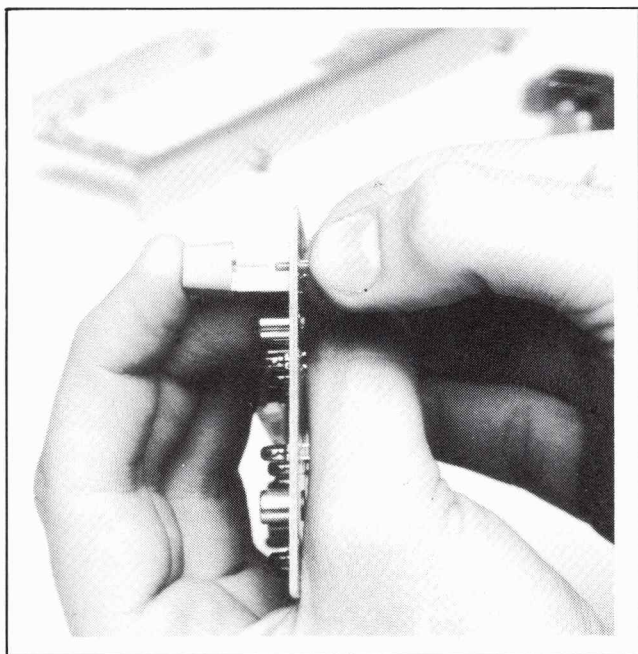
Display P.C. Board Switch/LED Alignment.
